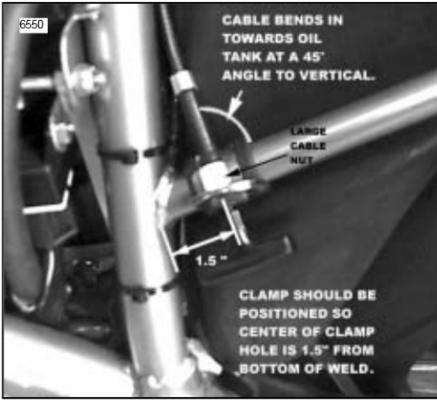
Cable Clamp Position (for 1997 frames w/out welded tab)
